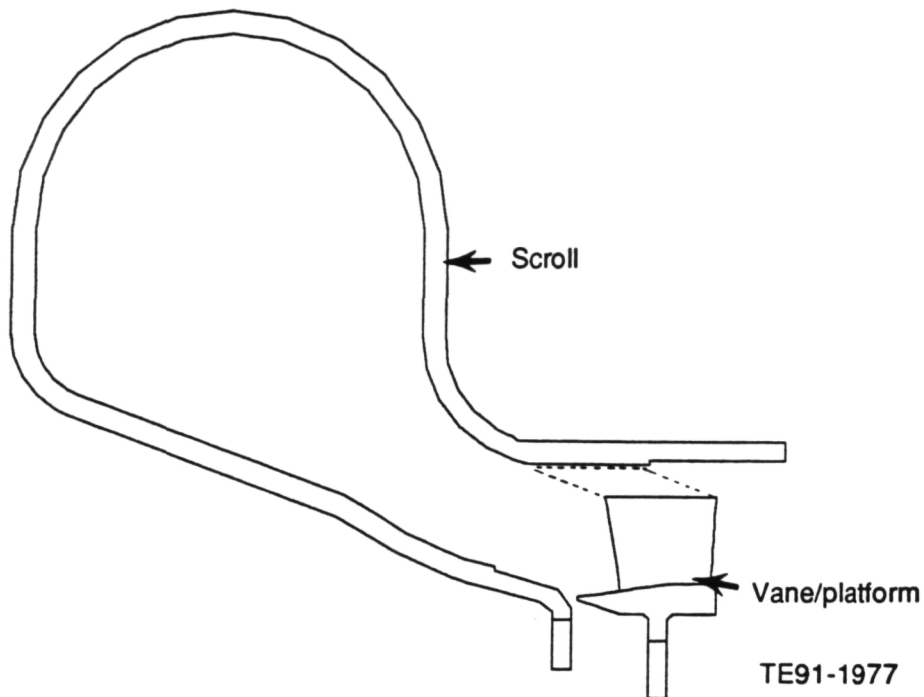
Modified scroll design (vane pockets and retaining ring removed) for use with one-piece integral vane platform.
